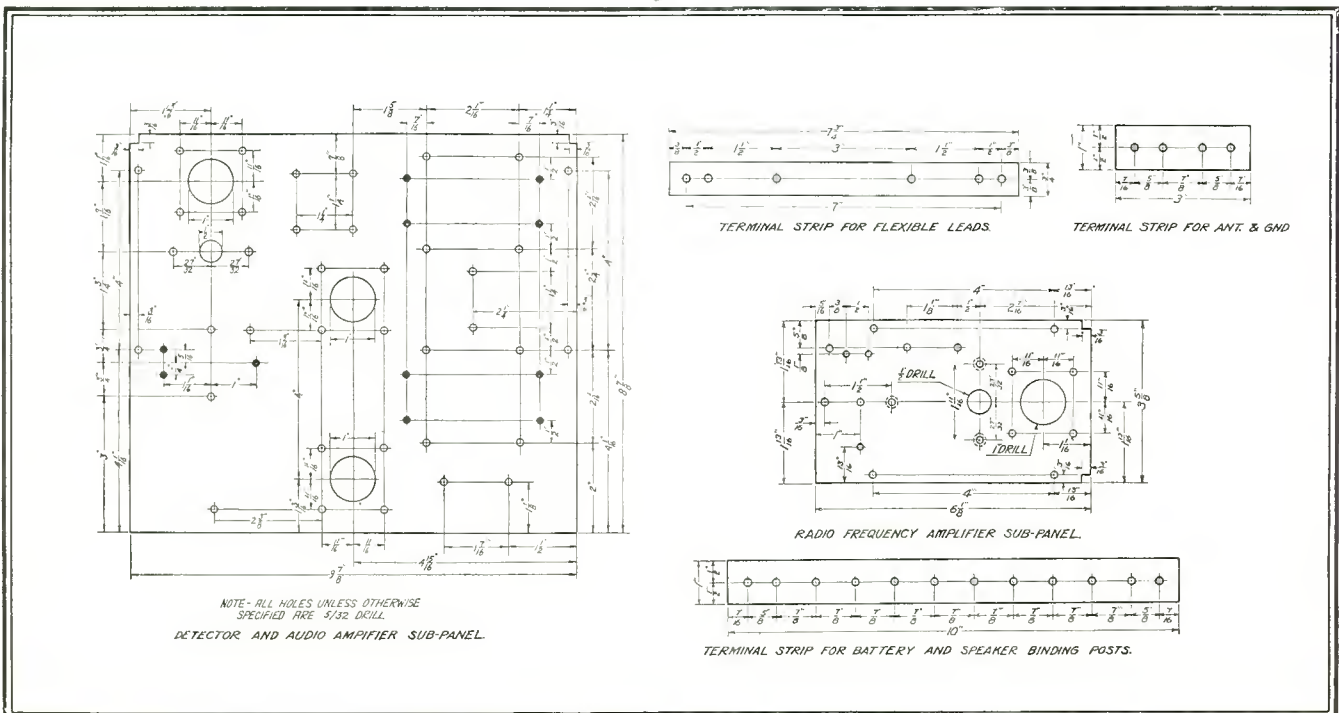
Layout of sub-panels and terminal strips. Holes shown solid are for wires
